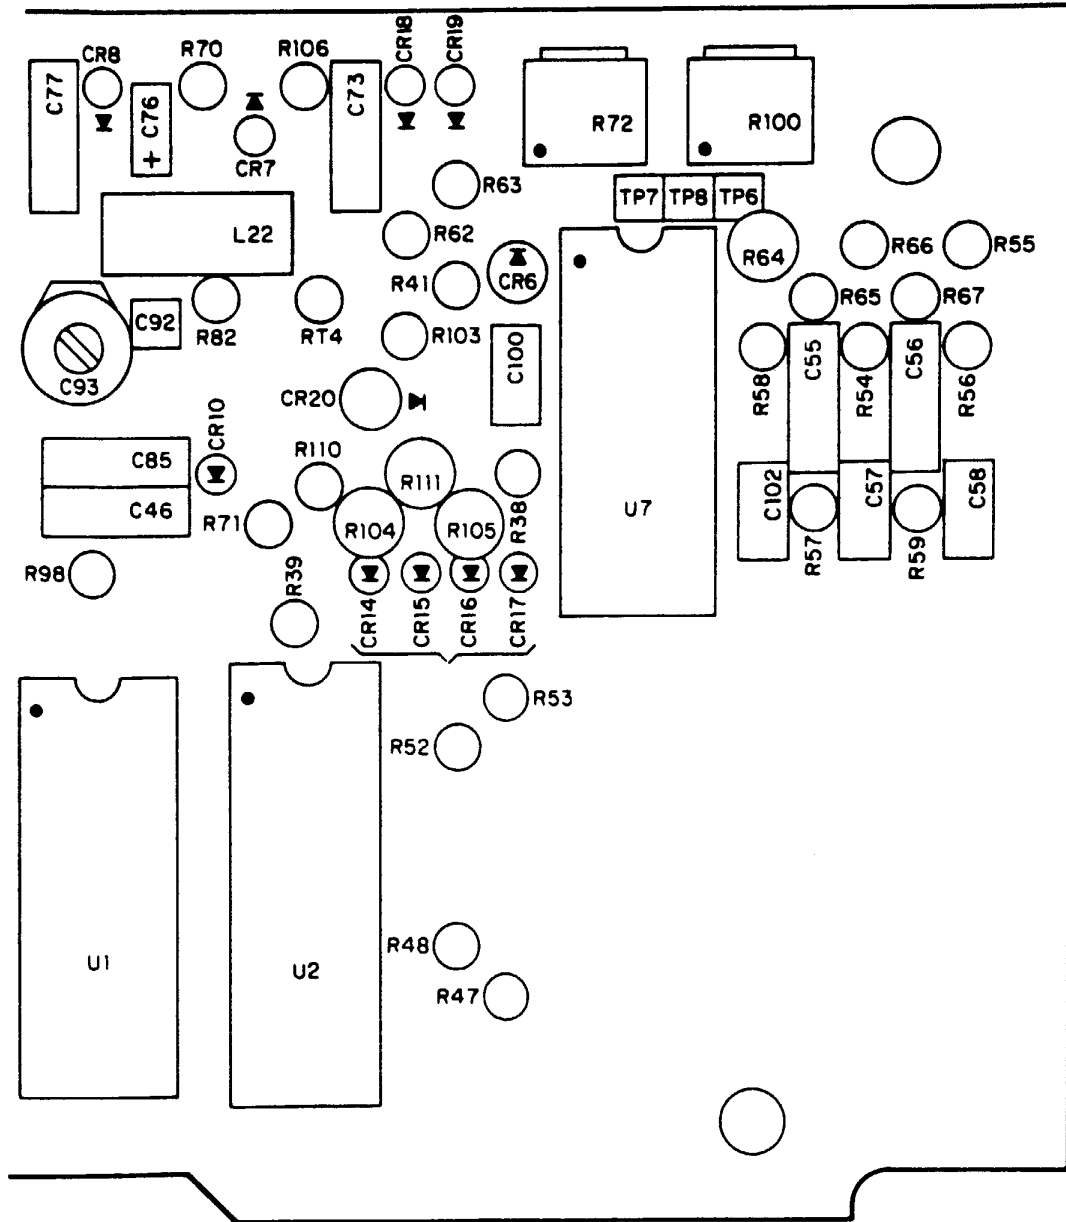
Guard Receiver Assembly A1A1A5 Component and Test Point Location Diagram (Sheet 2 of 5)
